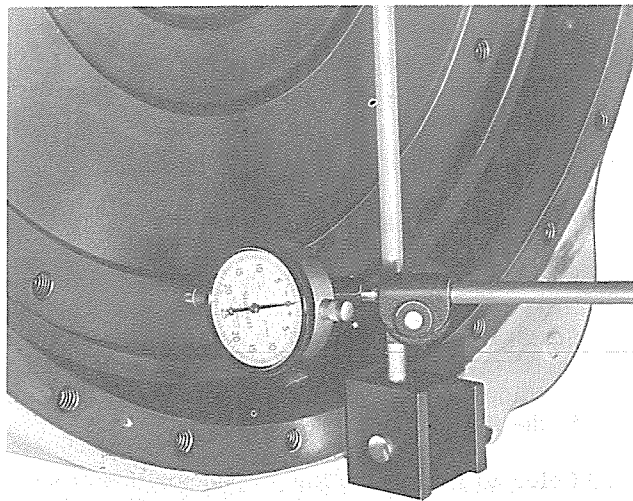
Measuring Run-Out of Flywheel Face (T-40271)
